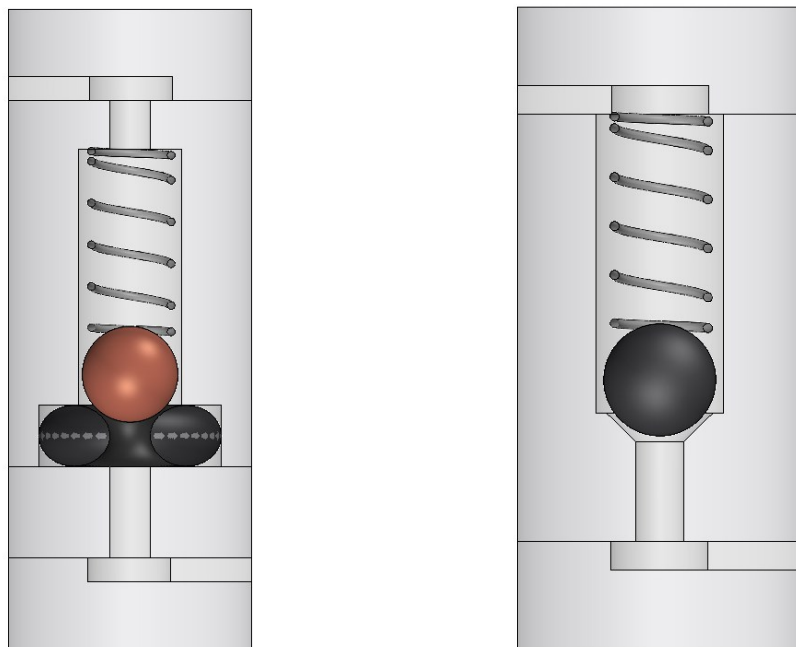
Left: Spring actuated ball valve with an O-ring seat and ceramic bearing. Right: Spring actuated ball-valve with an FKM ball and PMMA seat.
